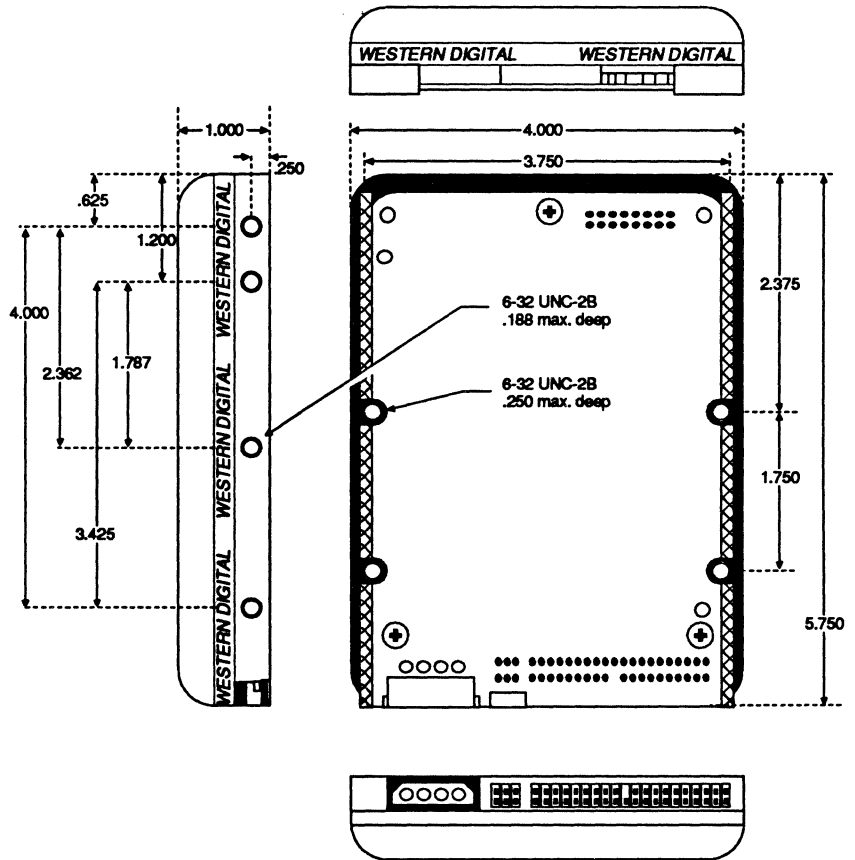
Caviar AC140/AC280 Mounting Dimensions
